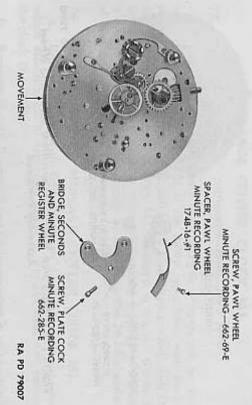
Elgin Stop Watch — Seconds and Minute Wheel Bridge Assembly Removed
